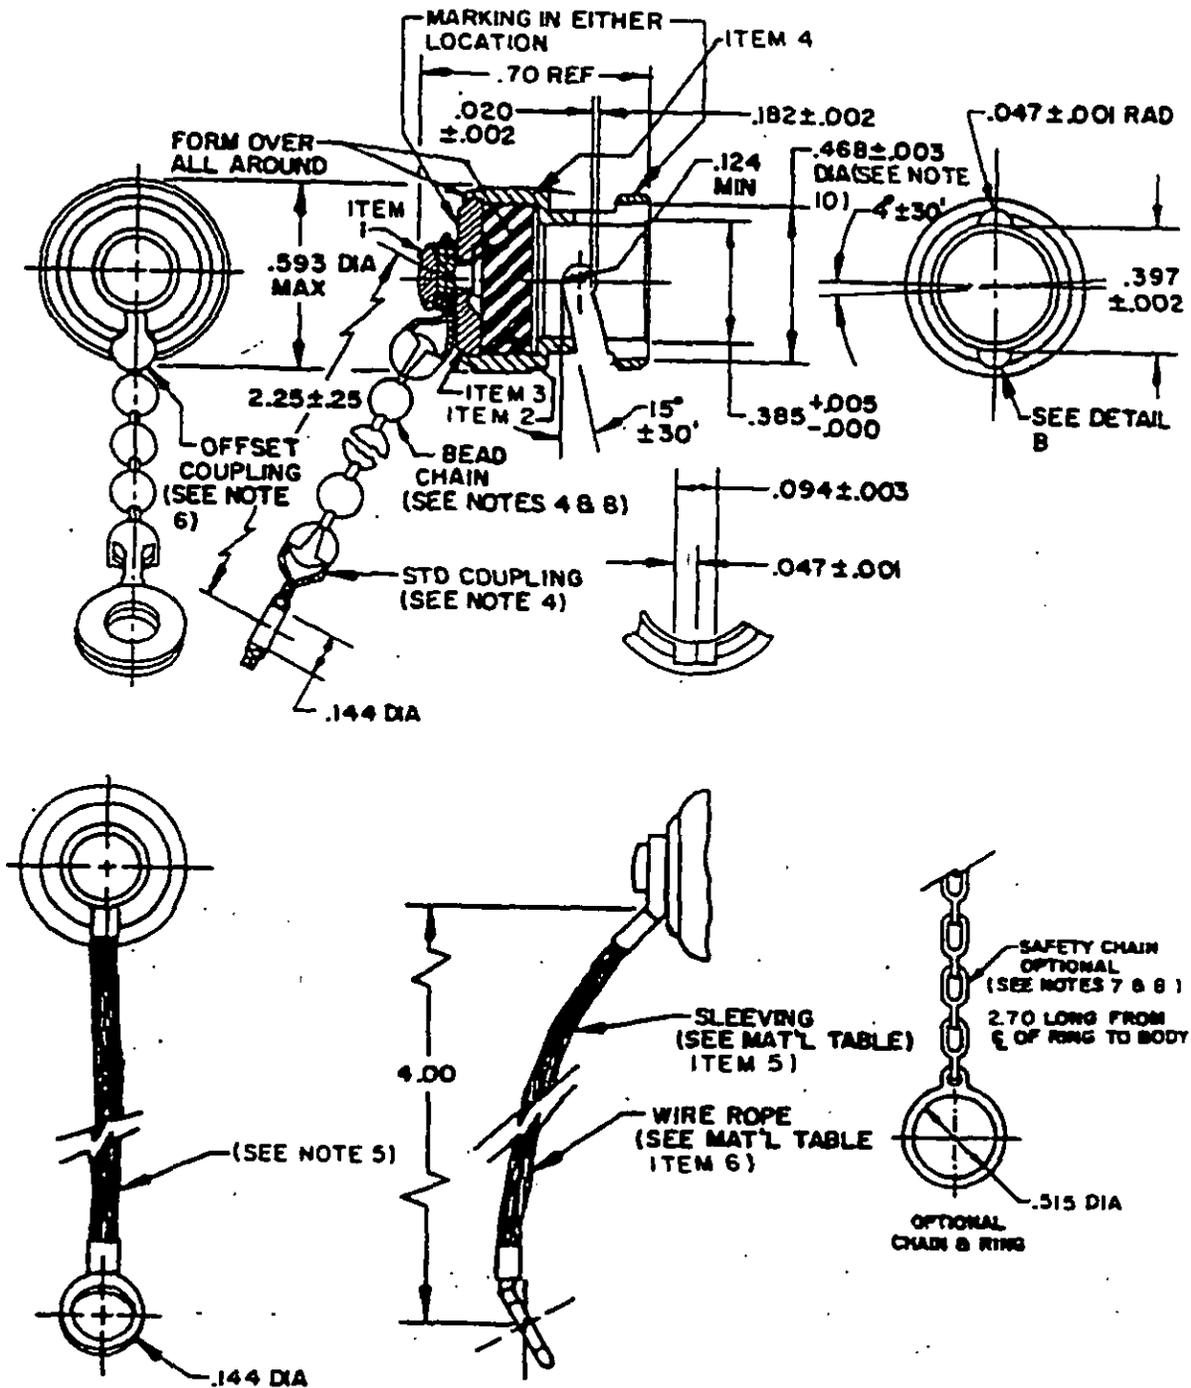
M39012/25-0006 cover for series BNC female connectors with bead chain.
